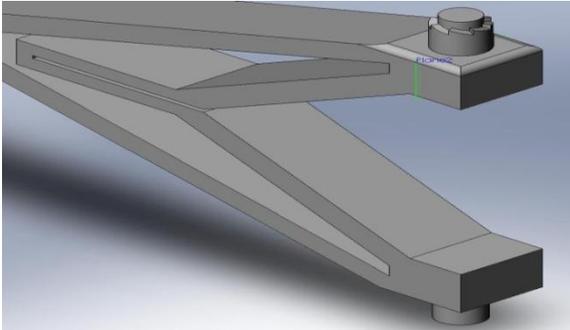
CAD drawing of forceps without sliding mechanism
